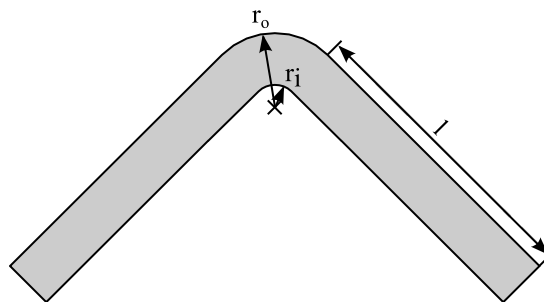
Schematic sketch of a preform specimen with geometry definitions.
